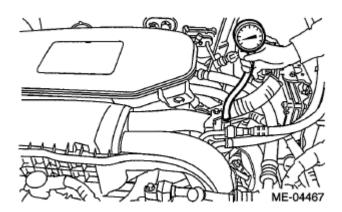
Disconnecting Brake Booster Vacuum Hose From Intake Manifold Courtesy of SUBARU OF AMERICA, INC.
